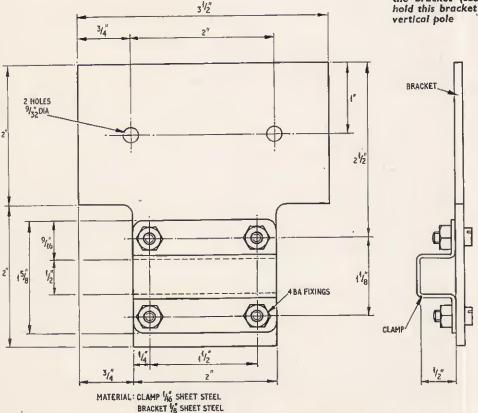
Details of the clamping plate and bracket. All parts should be well protected by painting with a primer, undercoat and gloss finish before assembly
